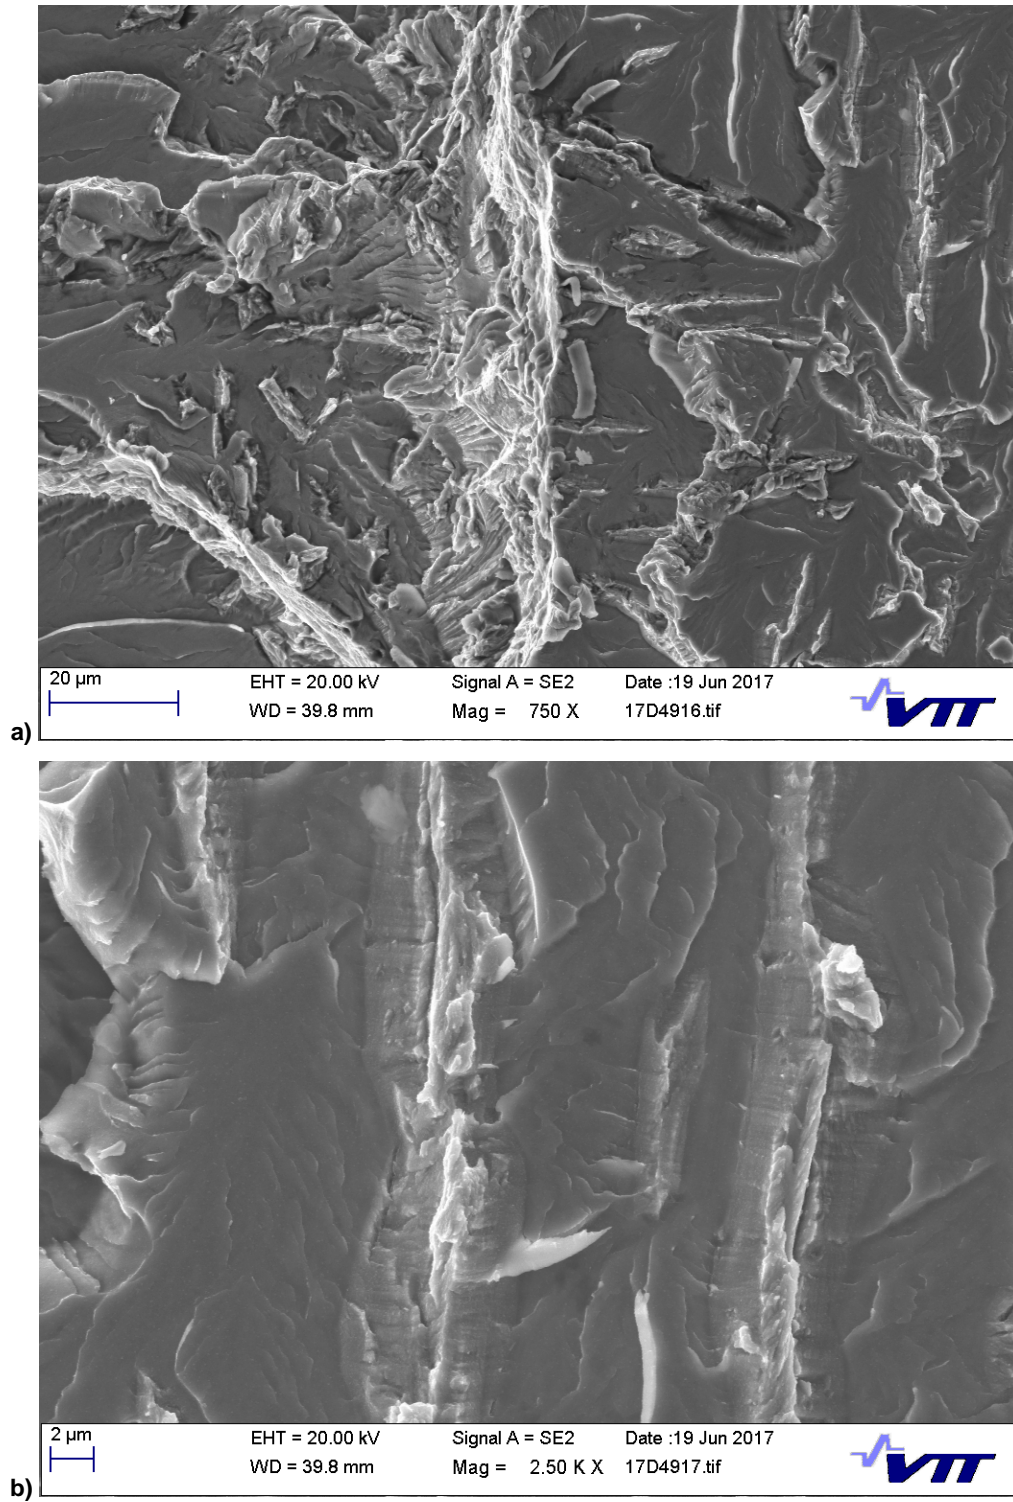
Fracture surface from the middle of the sample, showing (a) ridges; (b) striations. Outer surface on top, fracture propagation from top to bottom.
